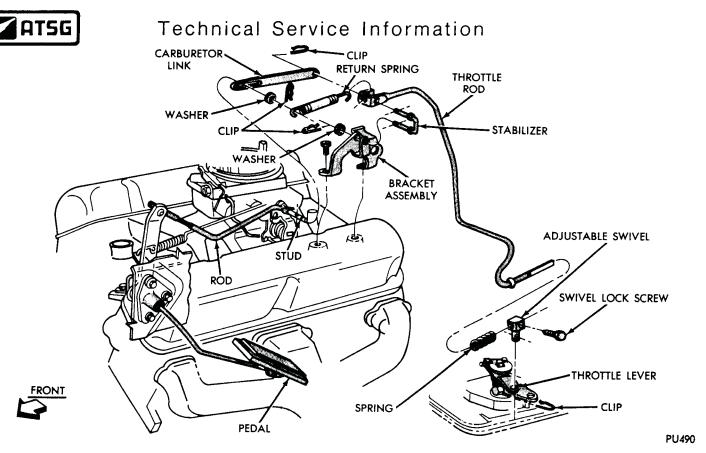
Throttle Rod Adjustment (8 Cylinder Models)
